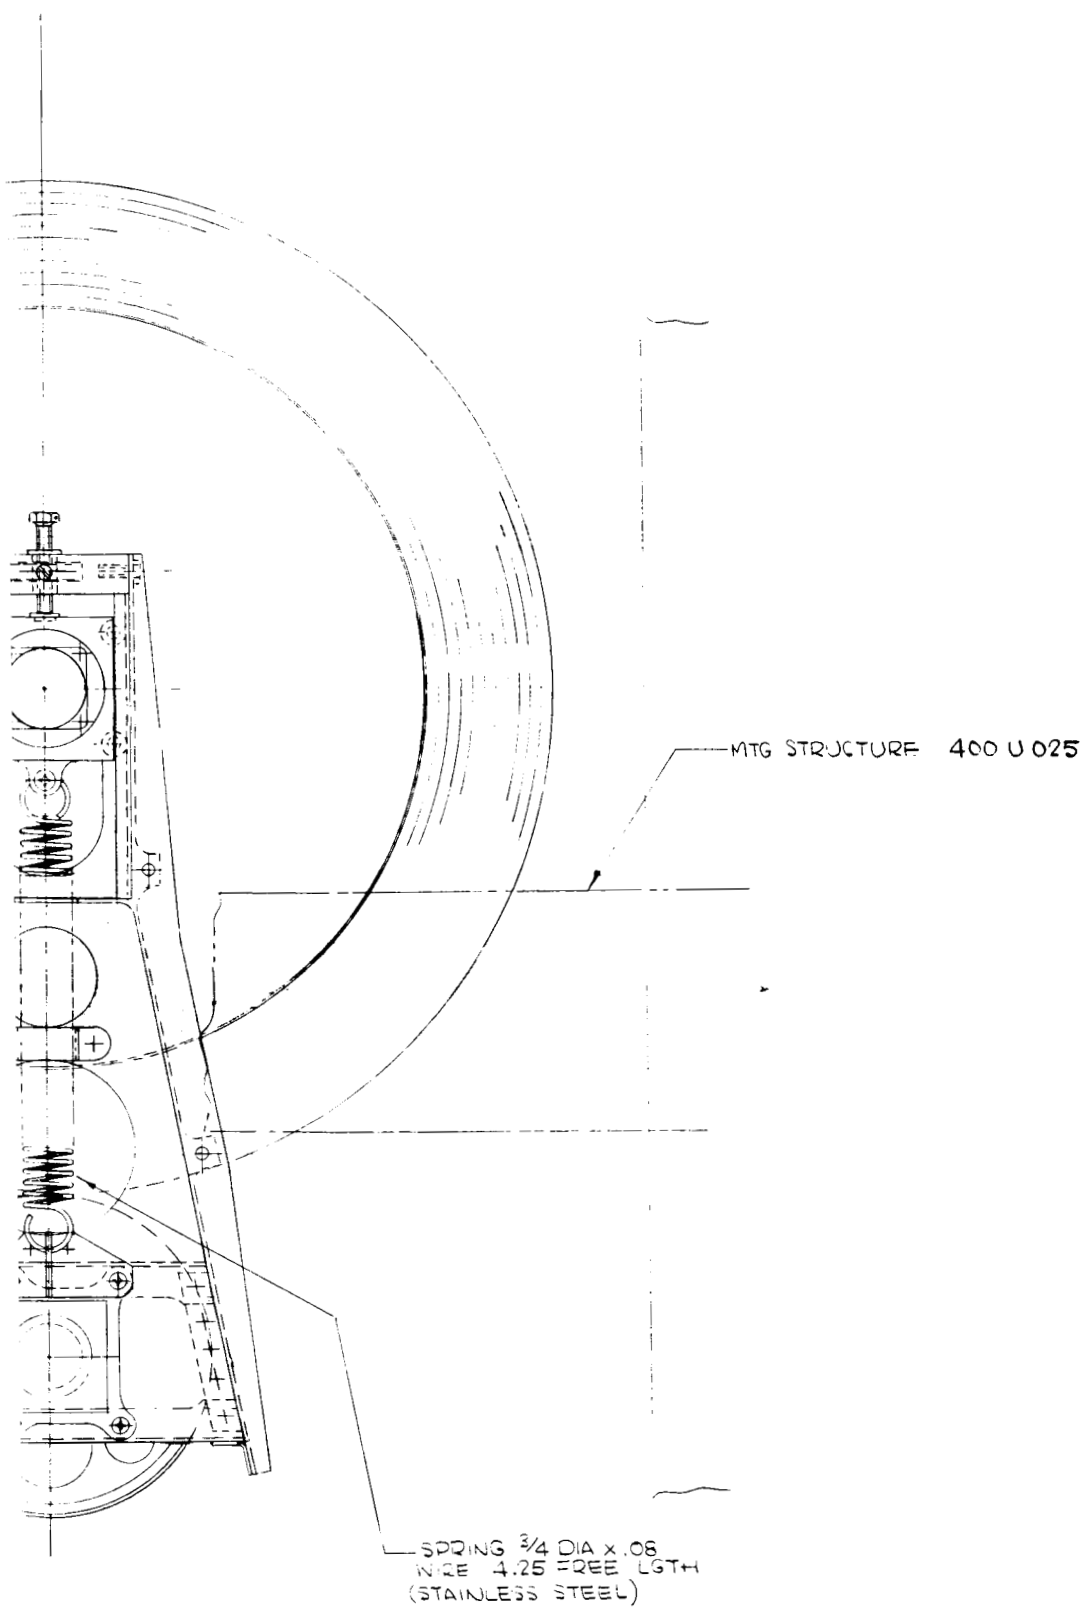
Rollout Solar Array - Modified Drum Support and Tensioning Concept
